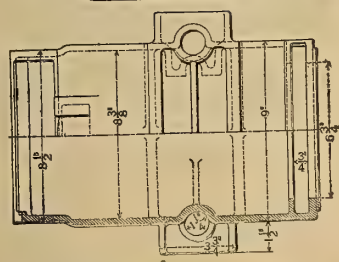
DOUBLE ROLLER SIDE BEARING. KINDT CAR TRUCK Co., MAKERS.
